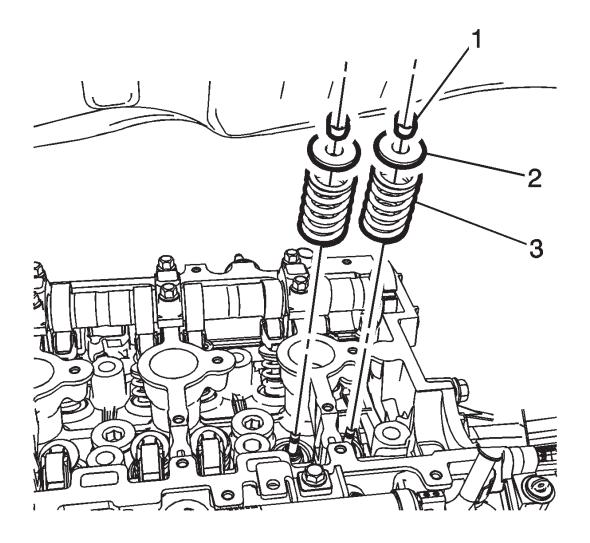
Valve Spring, Keepers And Retainer Courtesy of GENERAL MOTORS COMPANY
